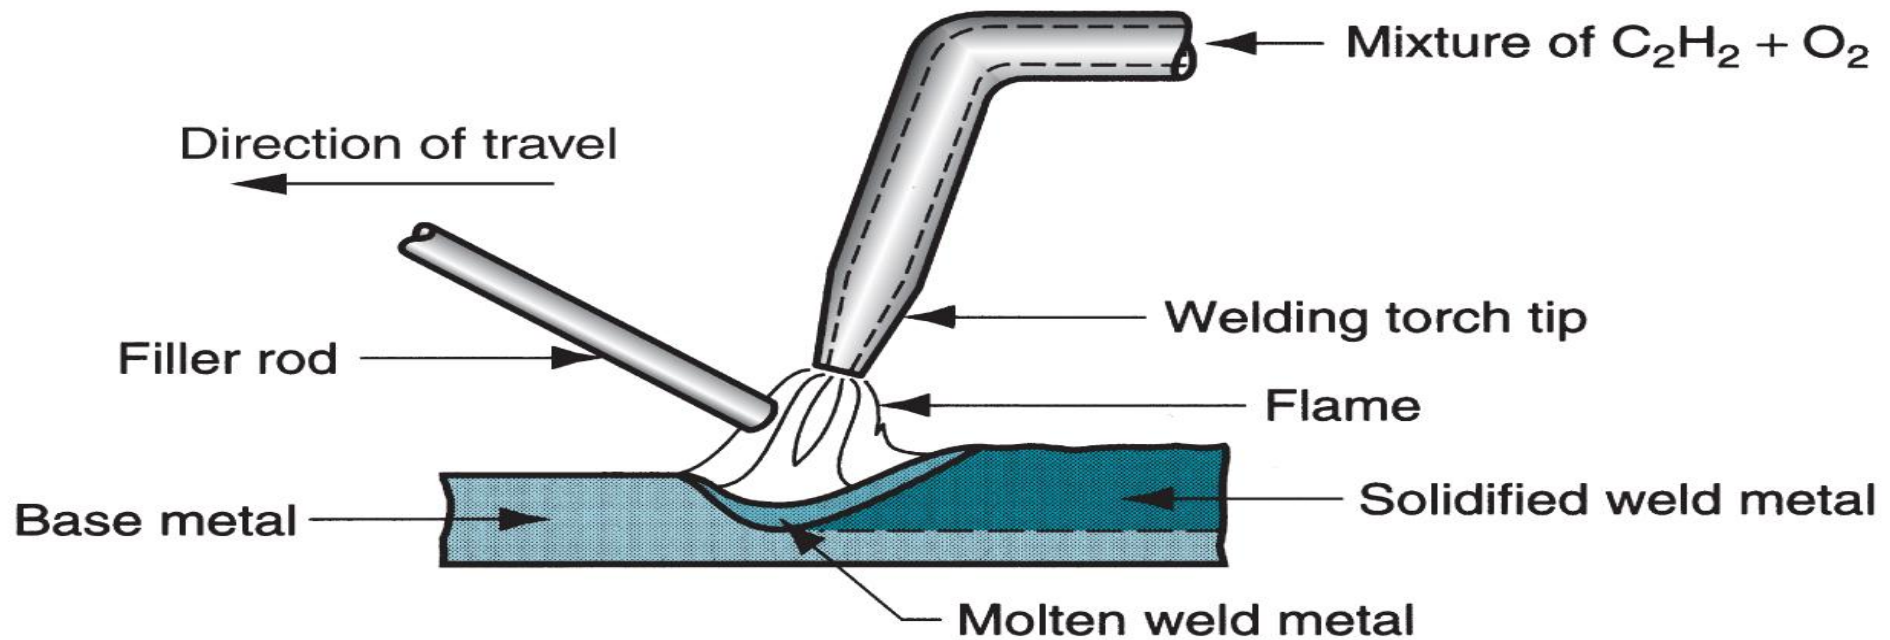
Blow Pipe Used in Gas Welding
